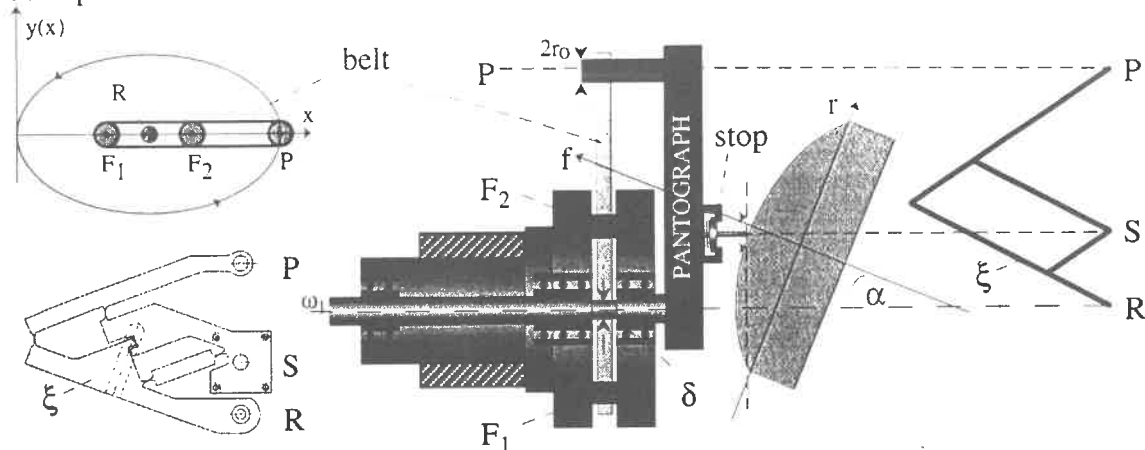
Sketch of a tool based on WAGNER for the generation of conic surfaces. The pantograph consists of a 15 mm thick aluminium plate comprising 4 pivot holes that are generated by electric discharge machining enabling a play-free movement of the pantograph.
